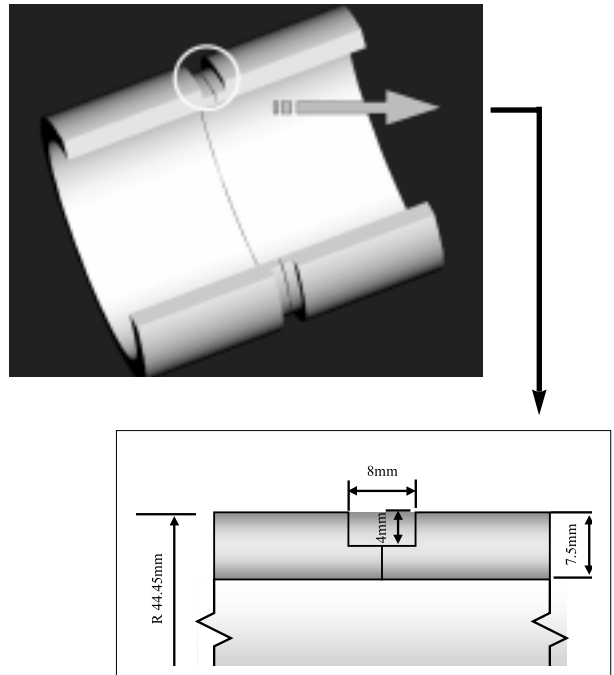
Joint geometry design for multi-pass welding measurement.
